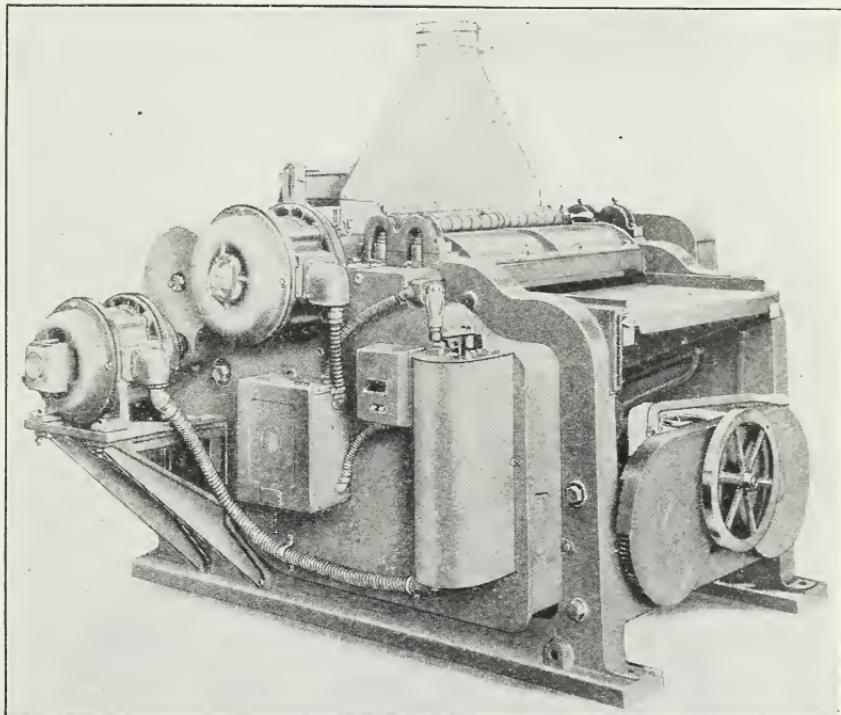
A cabinet planer suitable for a modern dimension-stock plant.
